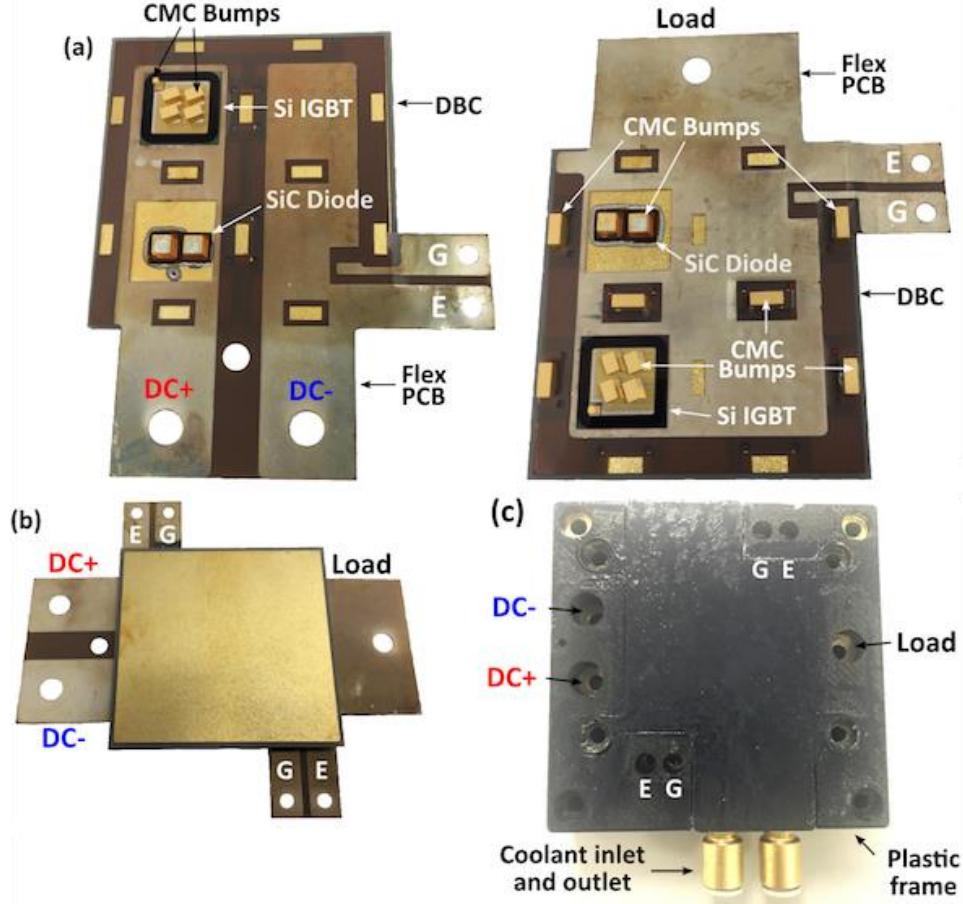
University of Nottingham module (a) before flip-chip assembly, (b) after flip-chip assembly, and (c) after mounting in cooling system [62]. Images used with permission of Bassem
